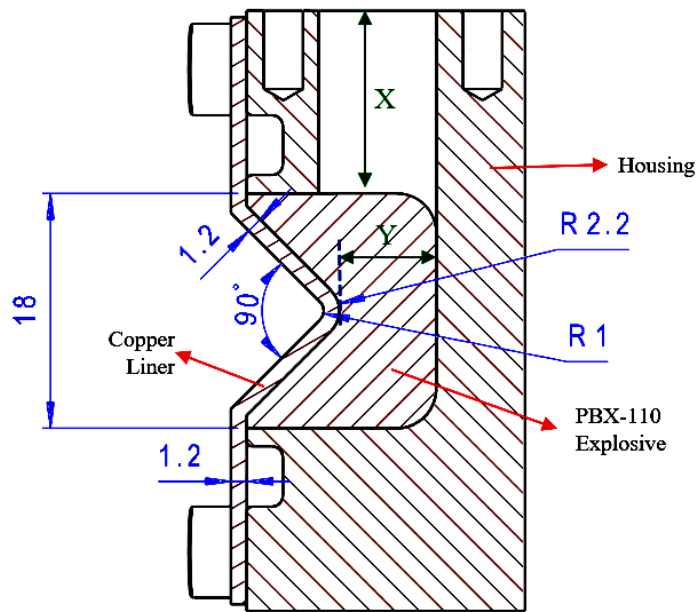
CLSC (On Tube of Inner Radius) Cross-sectional and Related Dimensions
